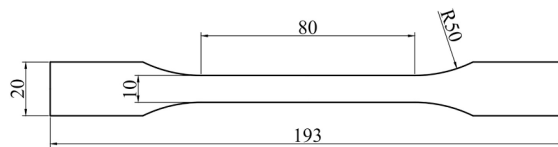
Dimensional drawing of UT_D100_00 specimen (4 mm thickness).
